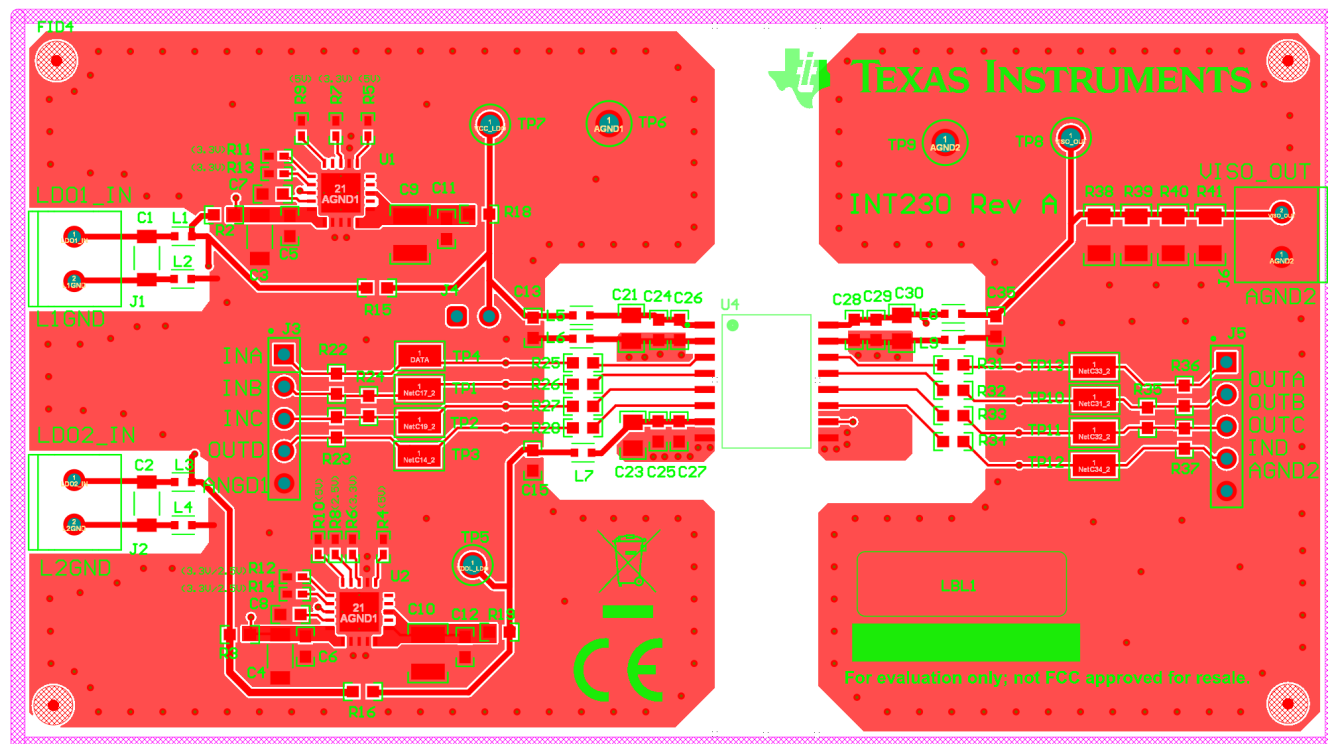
ISOW6441DWEEVM PCB Layout - Top
